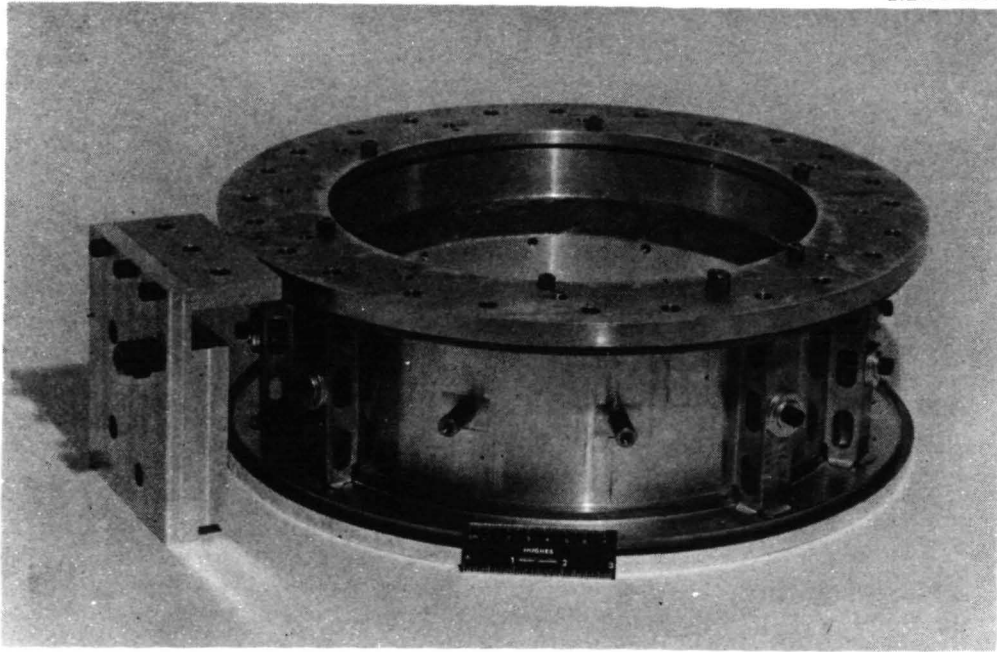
Thruster shell structure welding and drilling fixtures.
